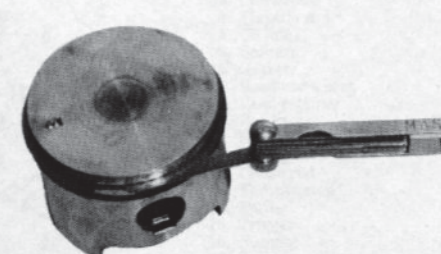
Ring side clearance in groove should be measured with feeler gage as shown. Clearance should be within recommended limits and the same all the way around piston.
